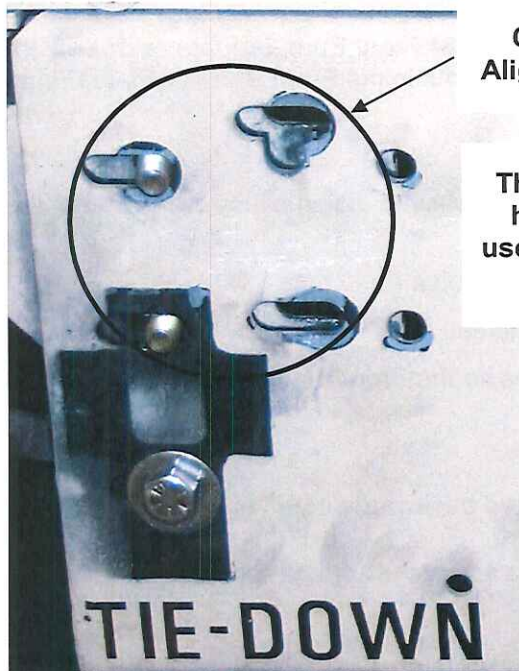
DETAIL OF PASSENGER SIDE MOUNTING HOLES
